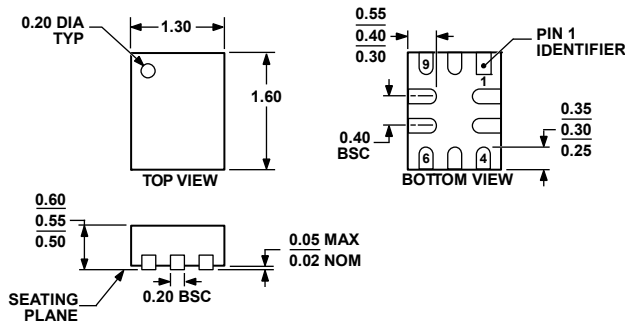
10-Lead Lead Frame Chip Scale Package [LFCSP_UQ]
